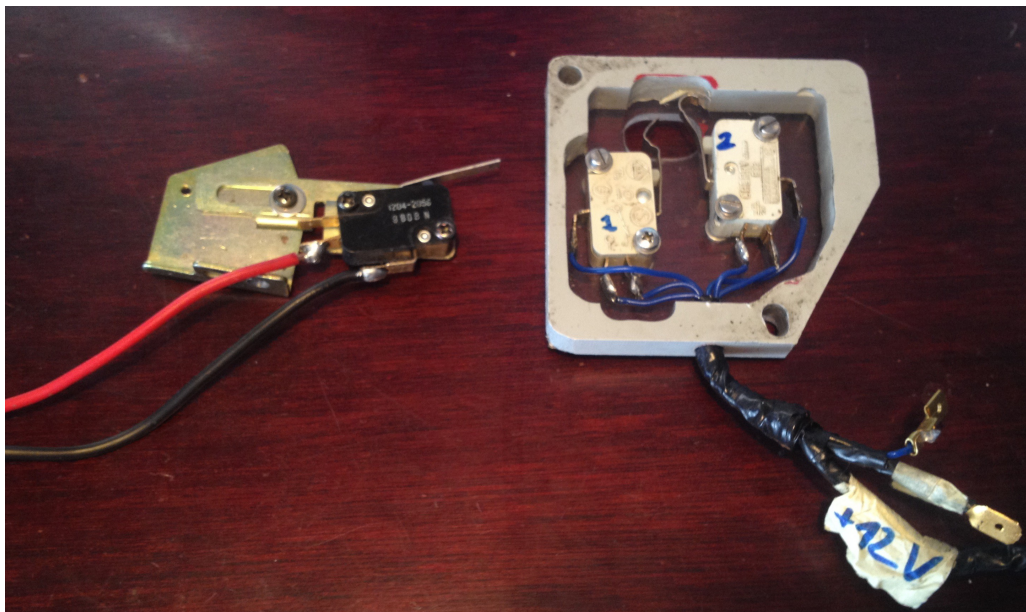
4: The limit switches and their supports after soldering the wires.
